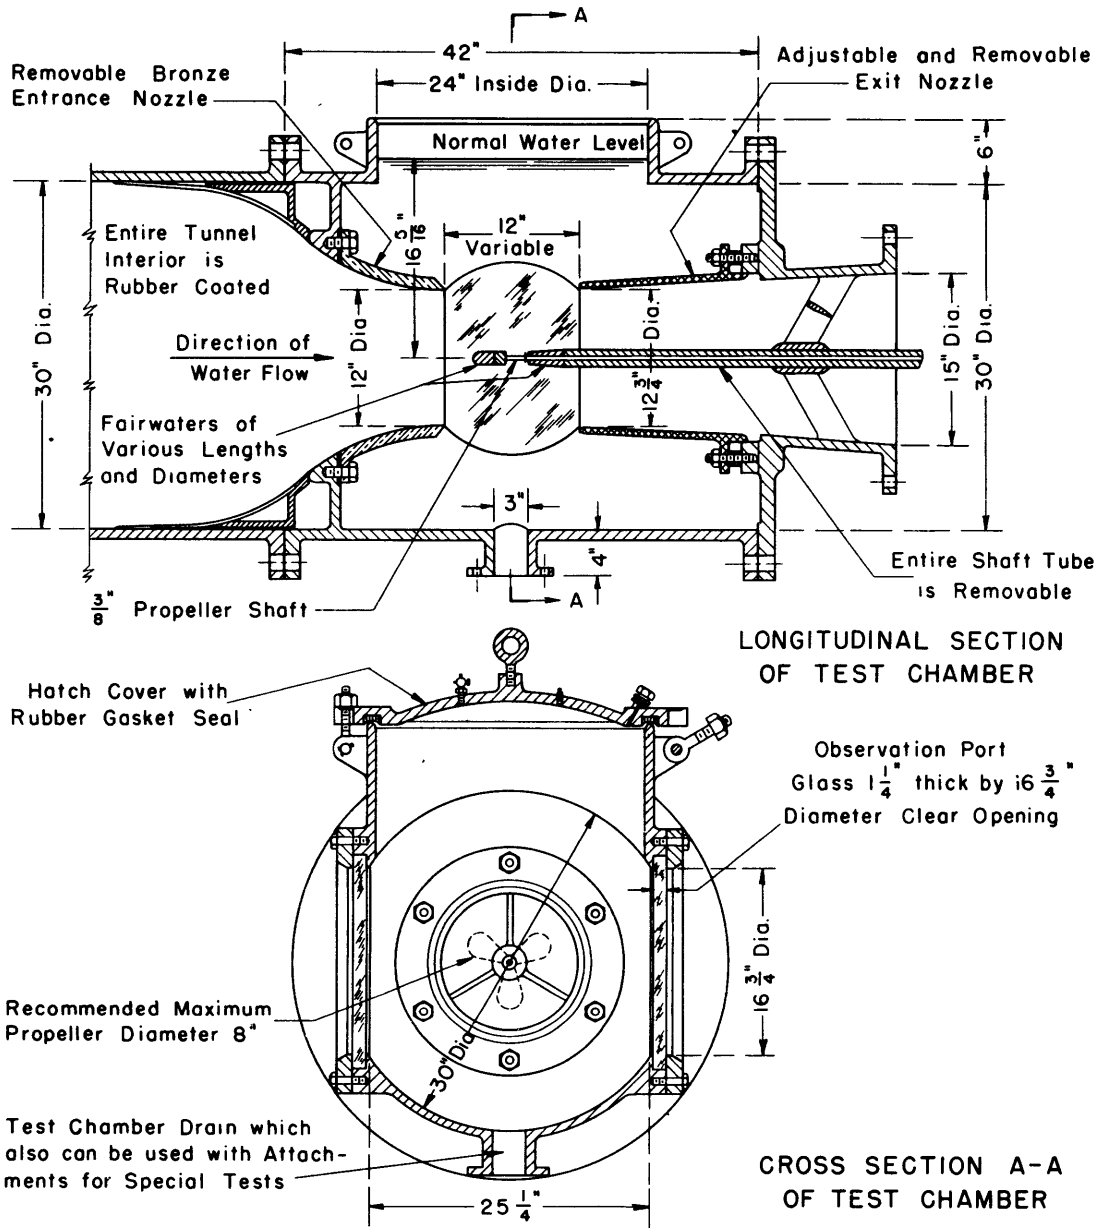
Sections through Test Chamber of 12-Inch Water Tunnel
